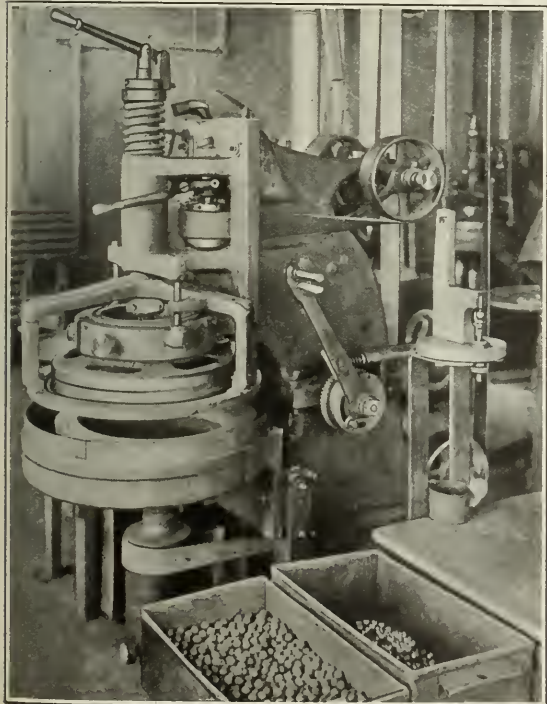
Side View of Dry-grinder, showing Wheel dropped away from Work, a Charge of Balls ready to be dropped into Grinding Position, and Ball being measured for Size in Test Indicator
